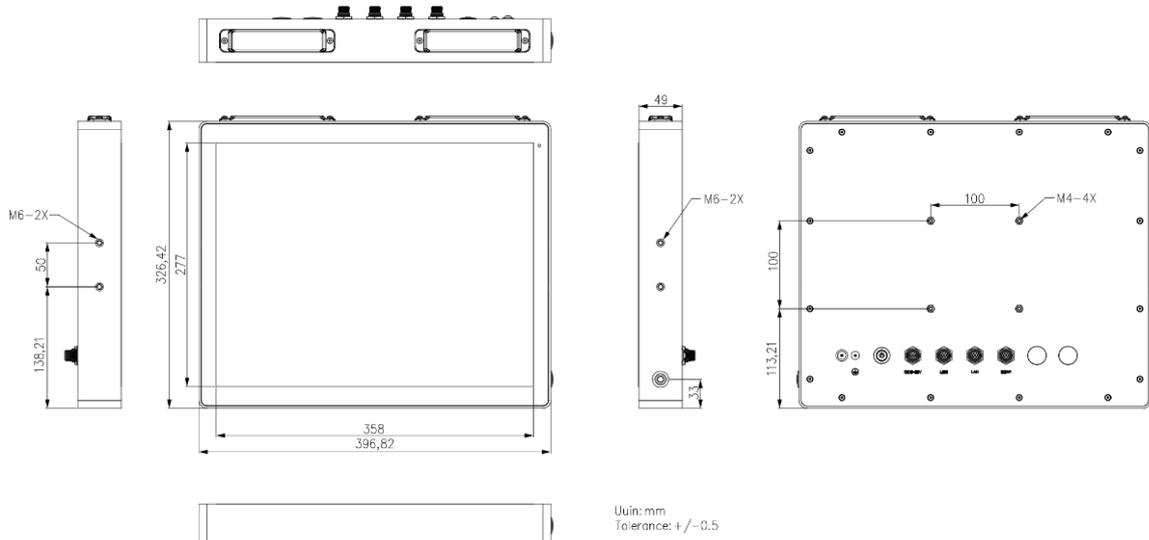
3 Dimensions of NuTAM-917EP(H)
